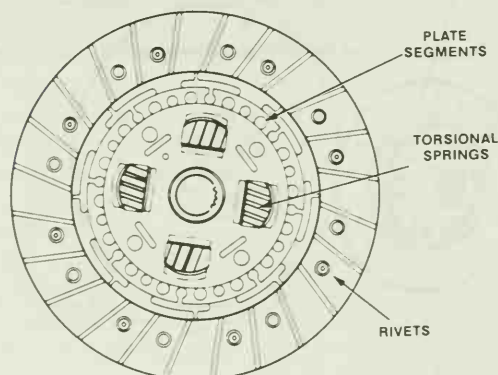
Torsional vibration springs are used to smooth out the power flow through the clutch. (American Motors Corporation)
